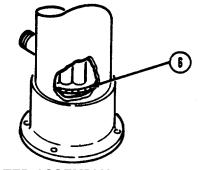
CARTRIDGE FILTER ASSEMBLY
